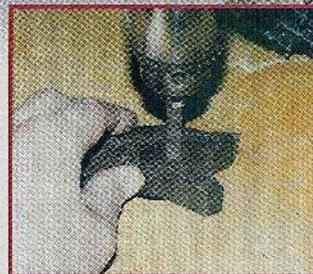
Sanding the cut edge on the drill press to create a smooth 90° edge.
